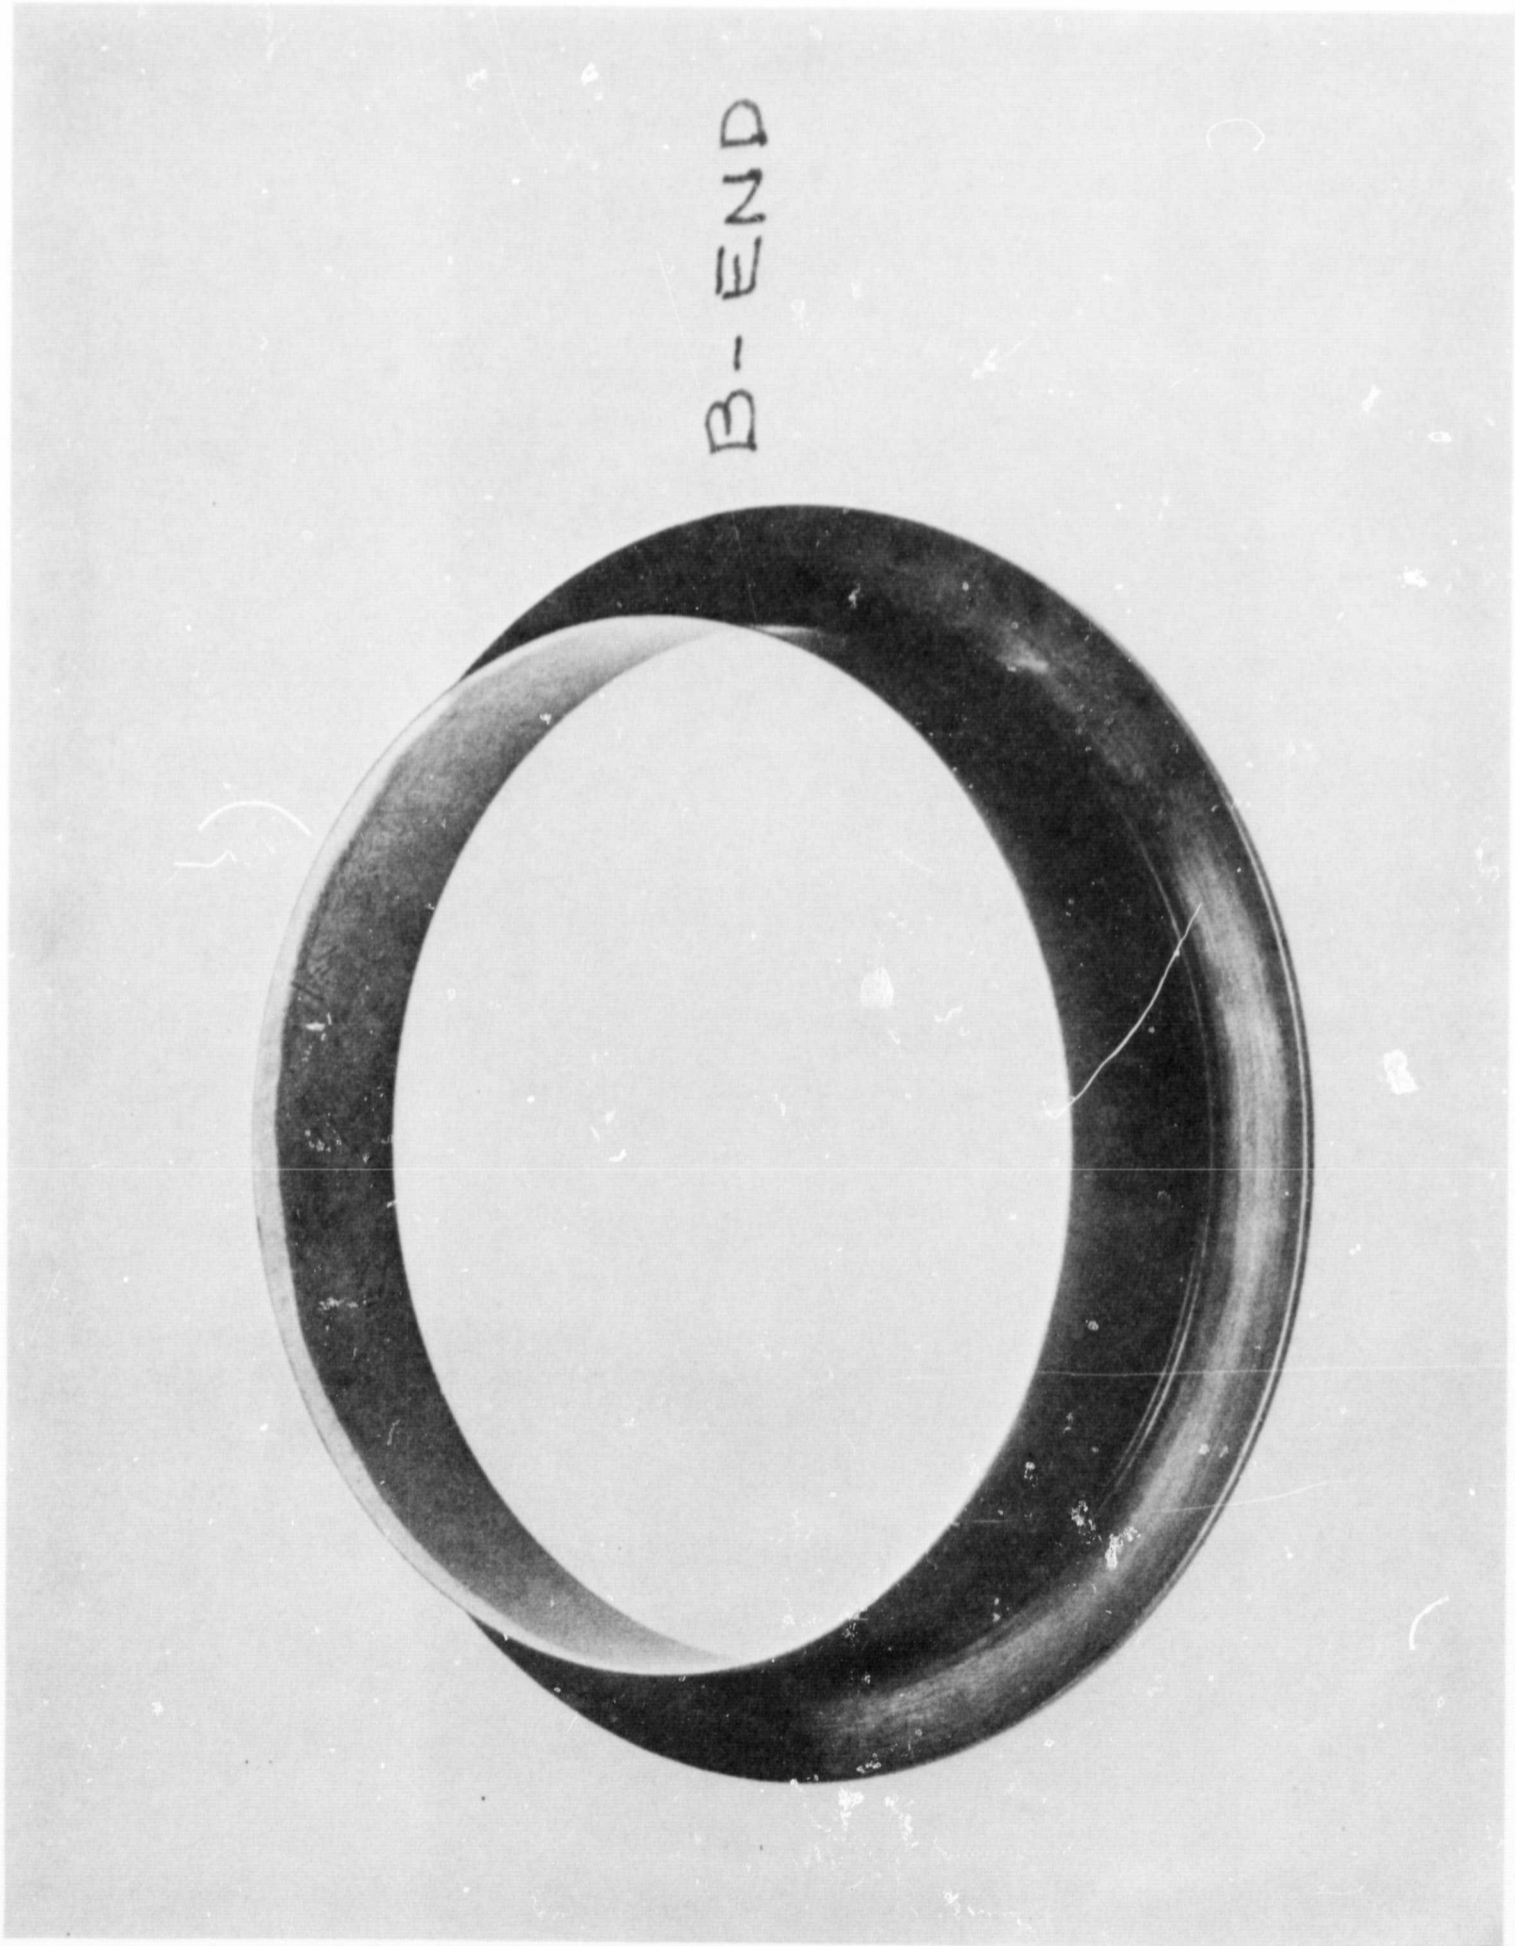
Three-Inch Cobalt Molybdenum Lip Seal, B-End
